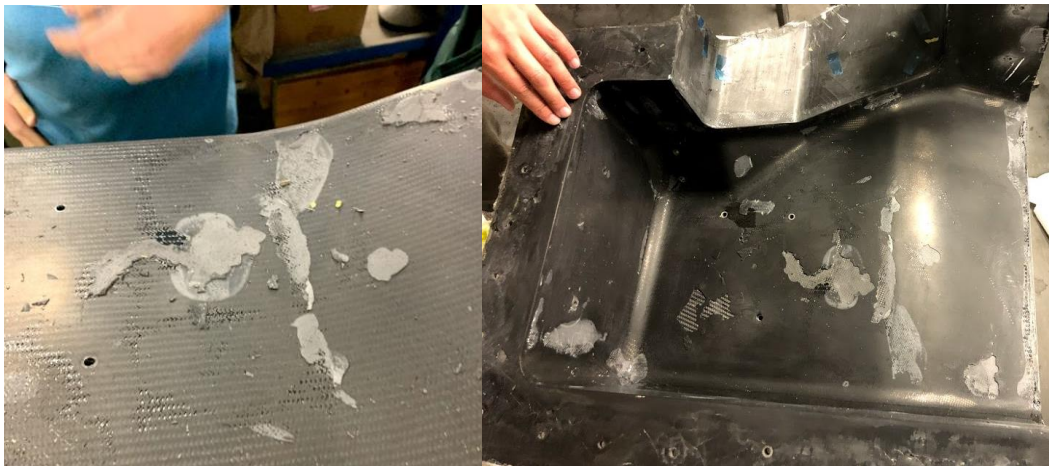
Bondo stuck to chassis surface (left) and resulting void in mold surface (right).
